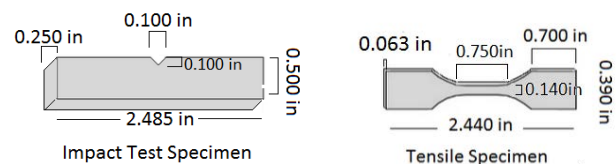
Cast specimens used for mechanical testing. The impact specimen has dimensions 2.49” x 0.5” x 0.25”, with notch depth and width of 0.10”. The tensile specimen has major dimensions of 2.44” x 0.39” x 0.063”.
